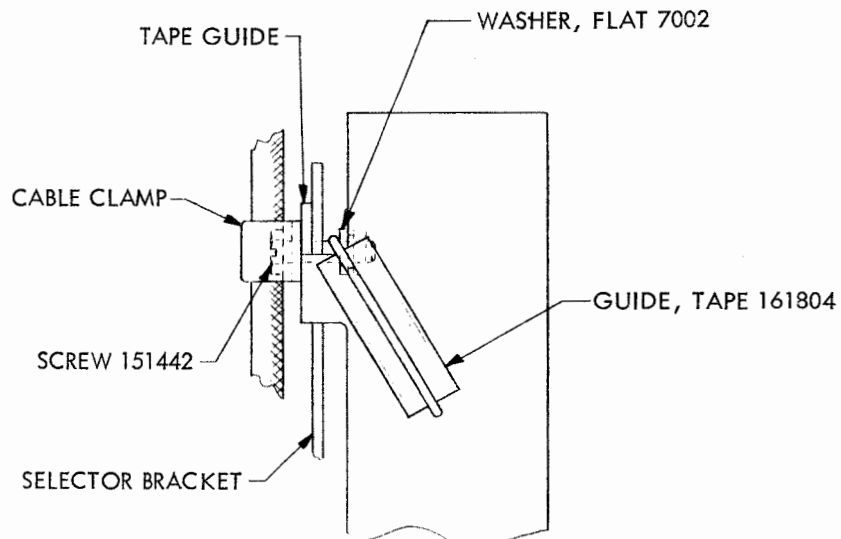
TAPE GUIDE MOUNTING FOR AUXILIARY REPERFORATOR
